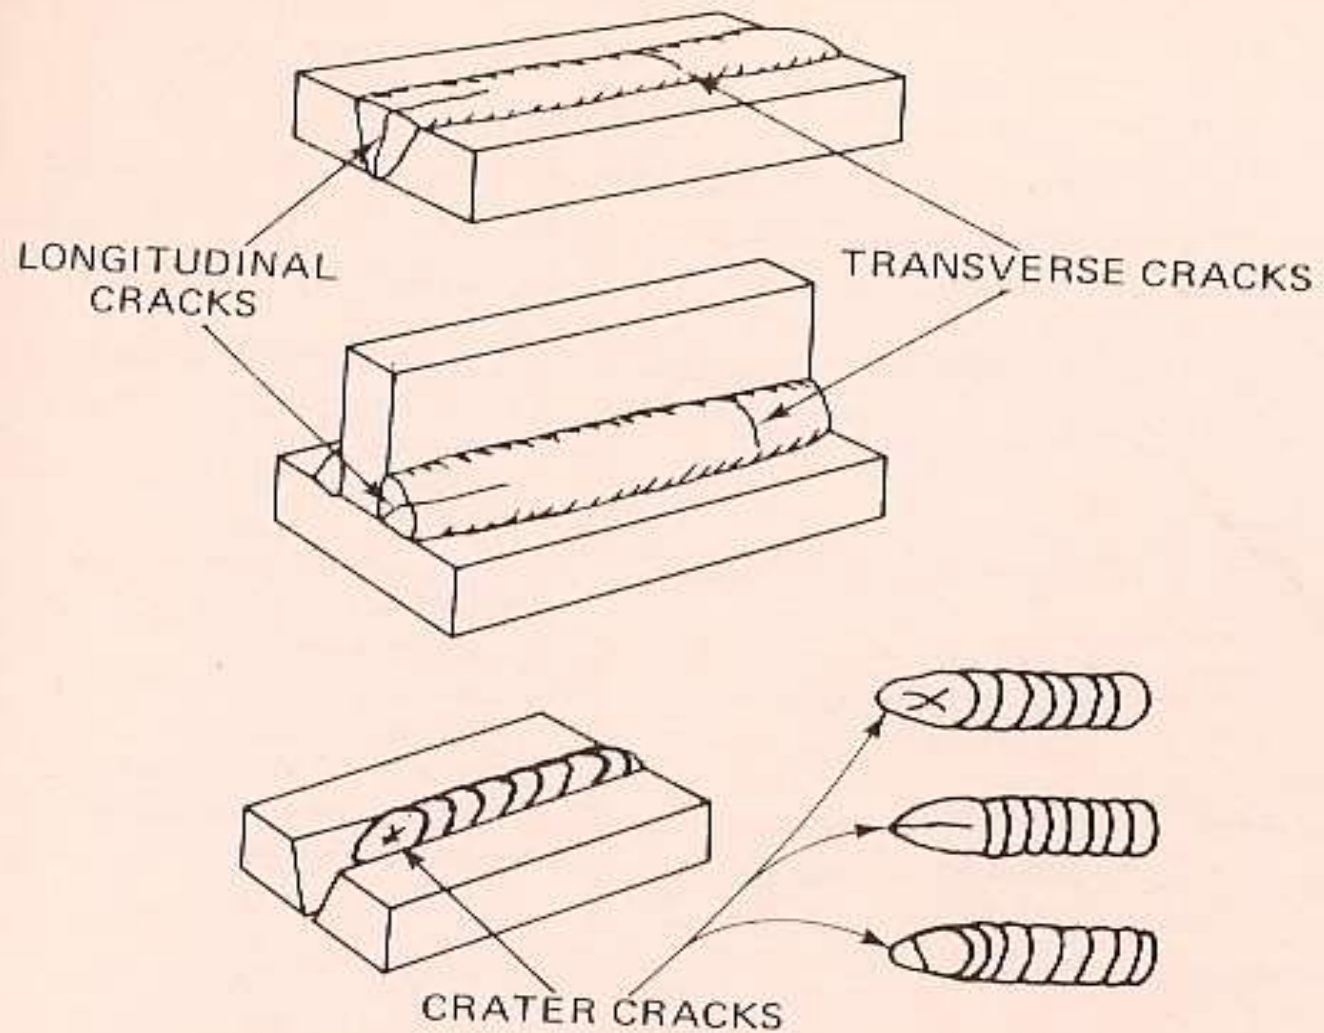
Types of surface cracks of welds.
